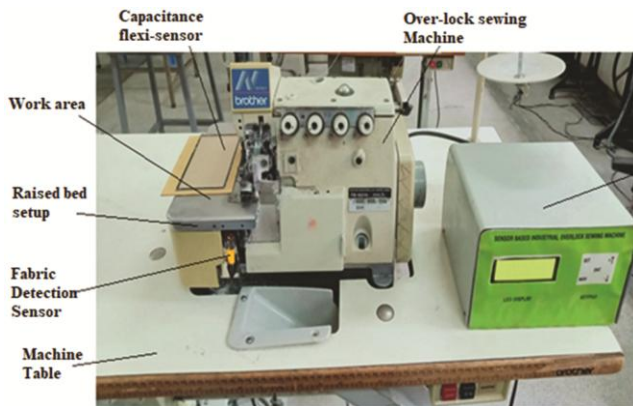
Flex touch sensor based operating method for over-lock sewing machine
